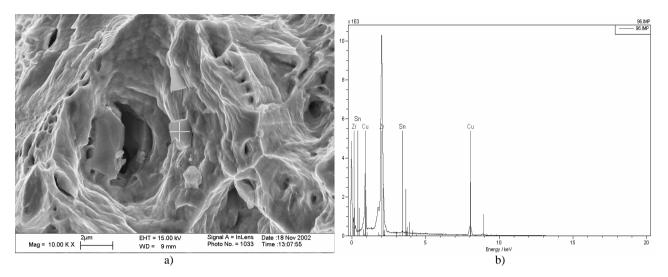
a) Fractography and b) special pointwise microanalysis of the chemical composition of inclusions in industrial tin bronze type CuSn6Zr alter hot rolling
